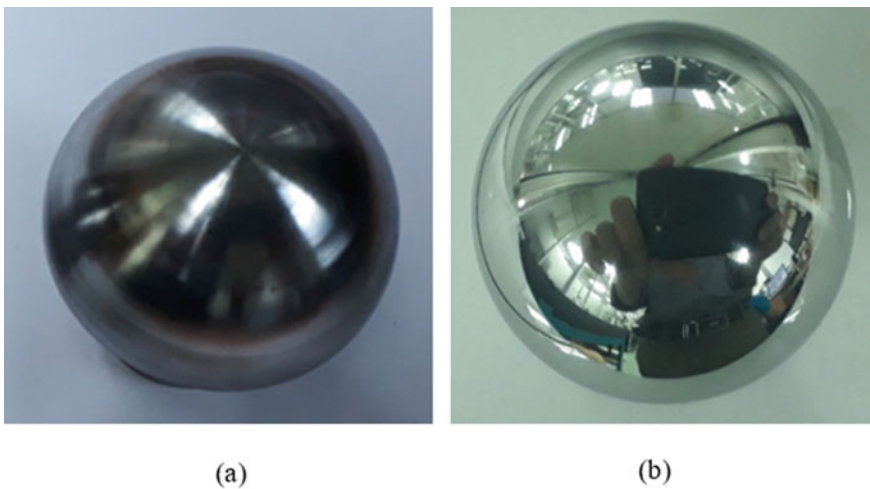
Picture of workpiece surface: a before processing, b after processing
